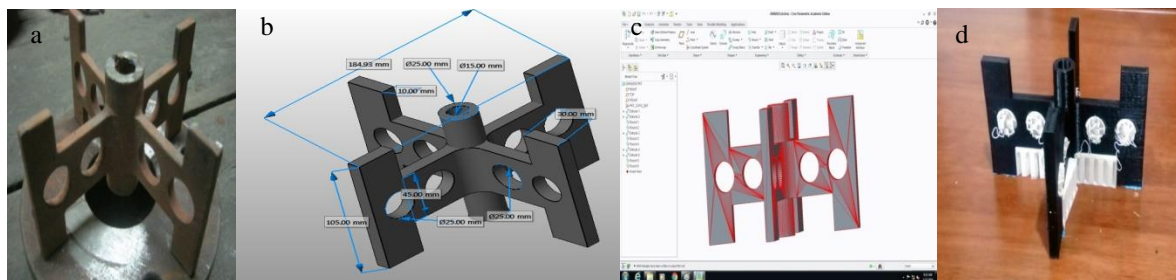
(a). Original grinder blade (b) CAD model (c) STL file (d) 3D printed blade before the deburring of support material.
